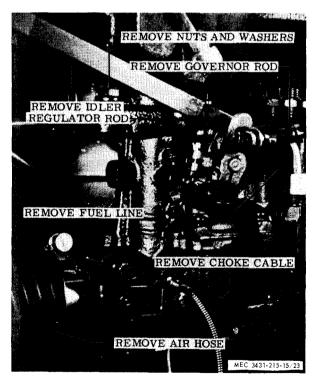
Carburetor, removal and installation. c. Adjustment. Adjust carburetor in accordance with porcedure outlined in paragraph 3-12.
